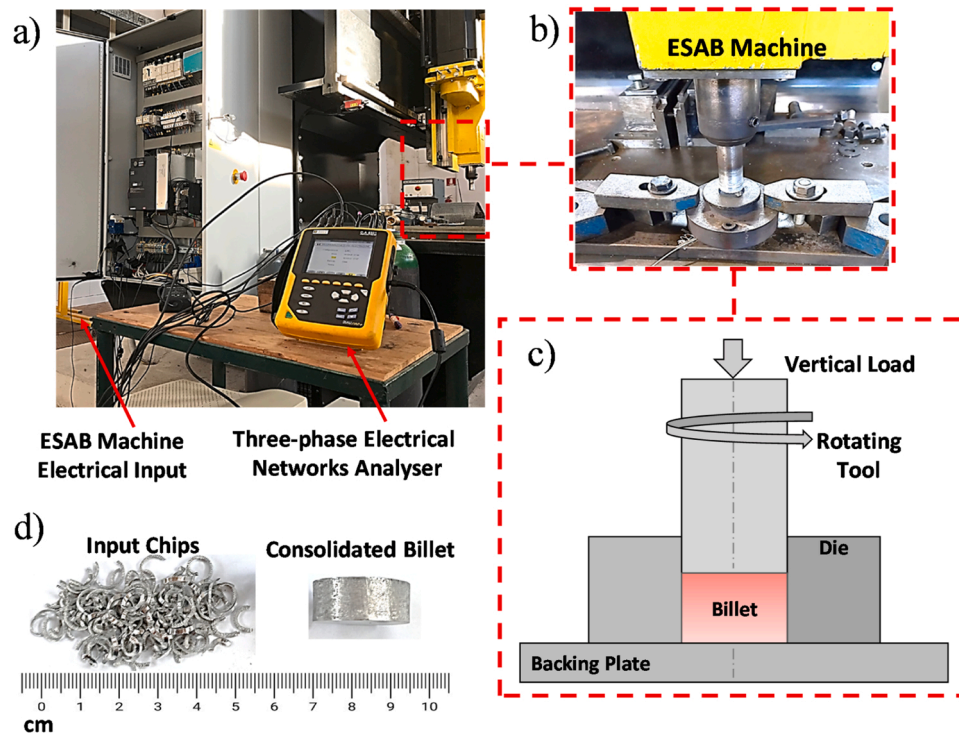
(a) Electric power acquisition set-up; (b) enlargement of the FSC tooling, c) Sketch of the process, d) chips and consolidated billet.
